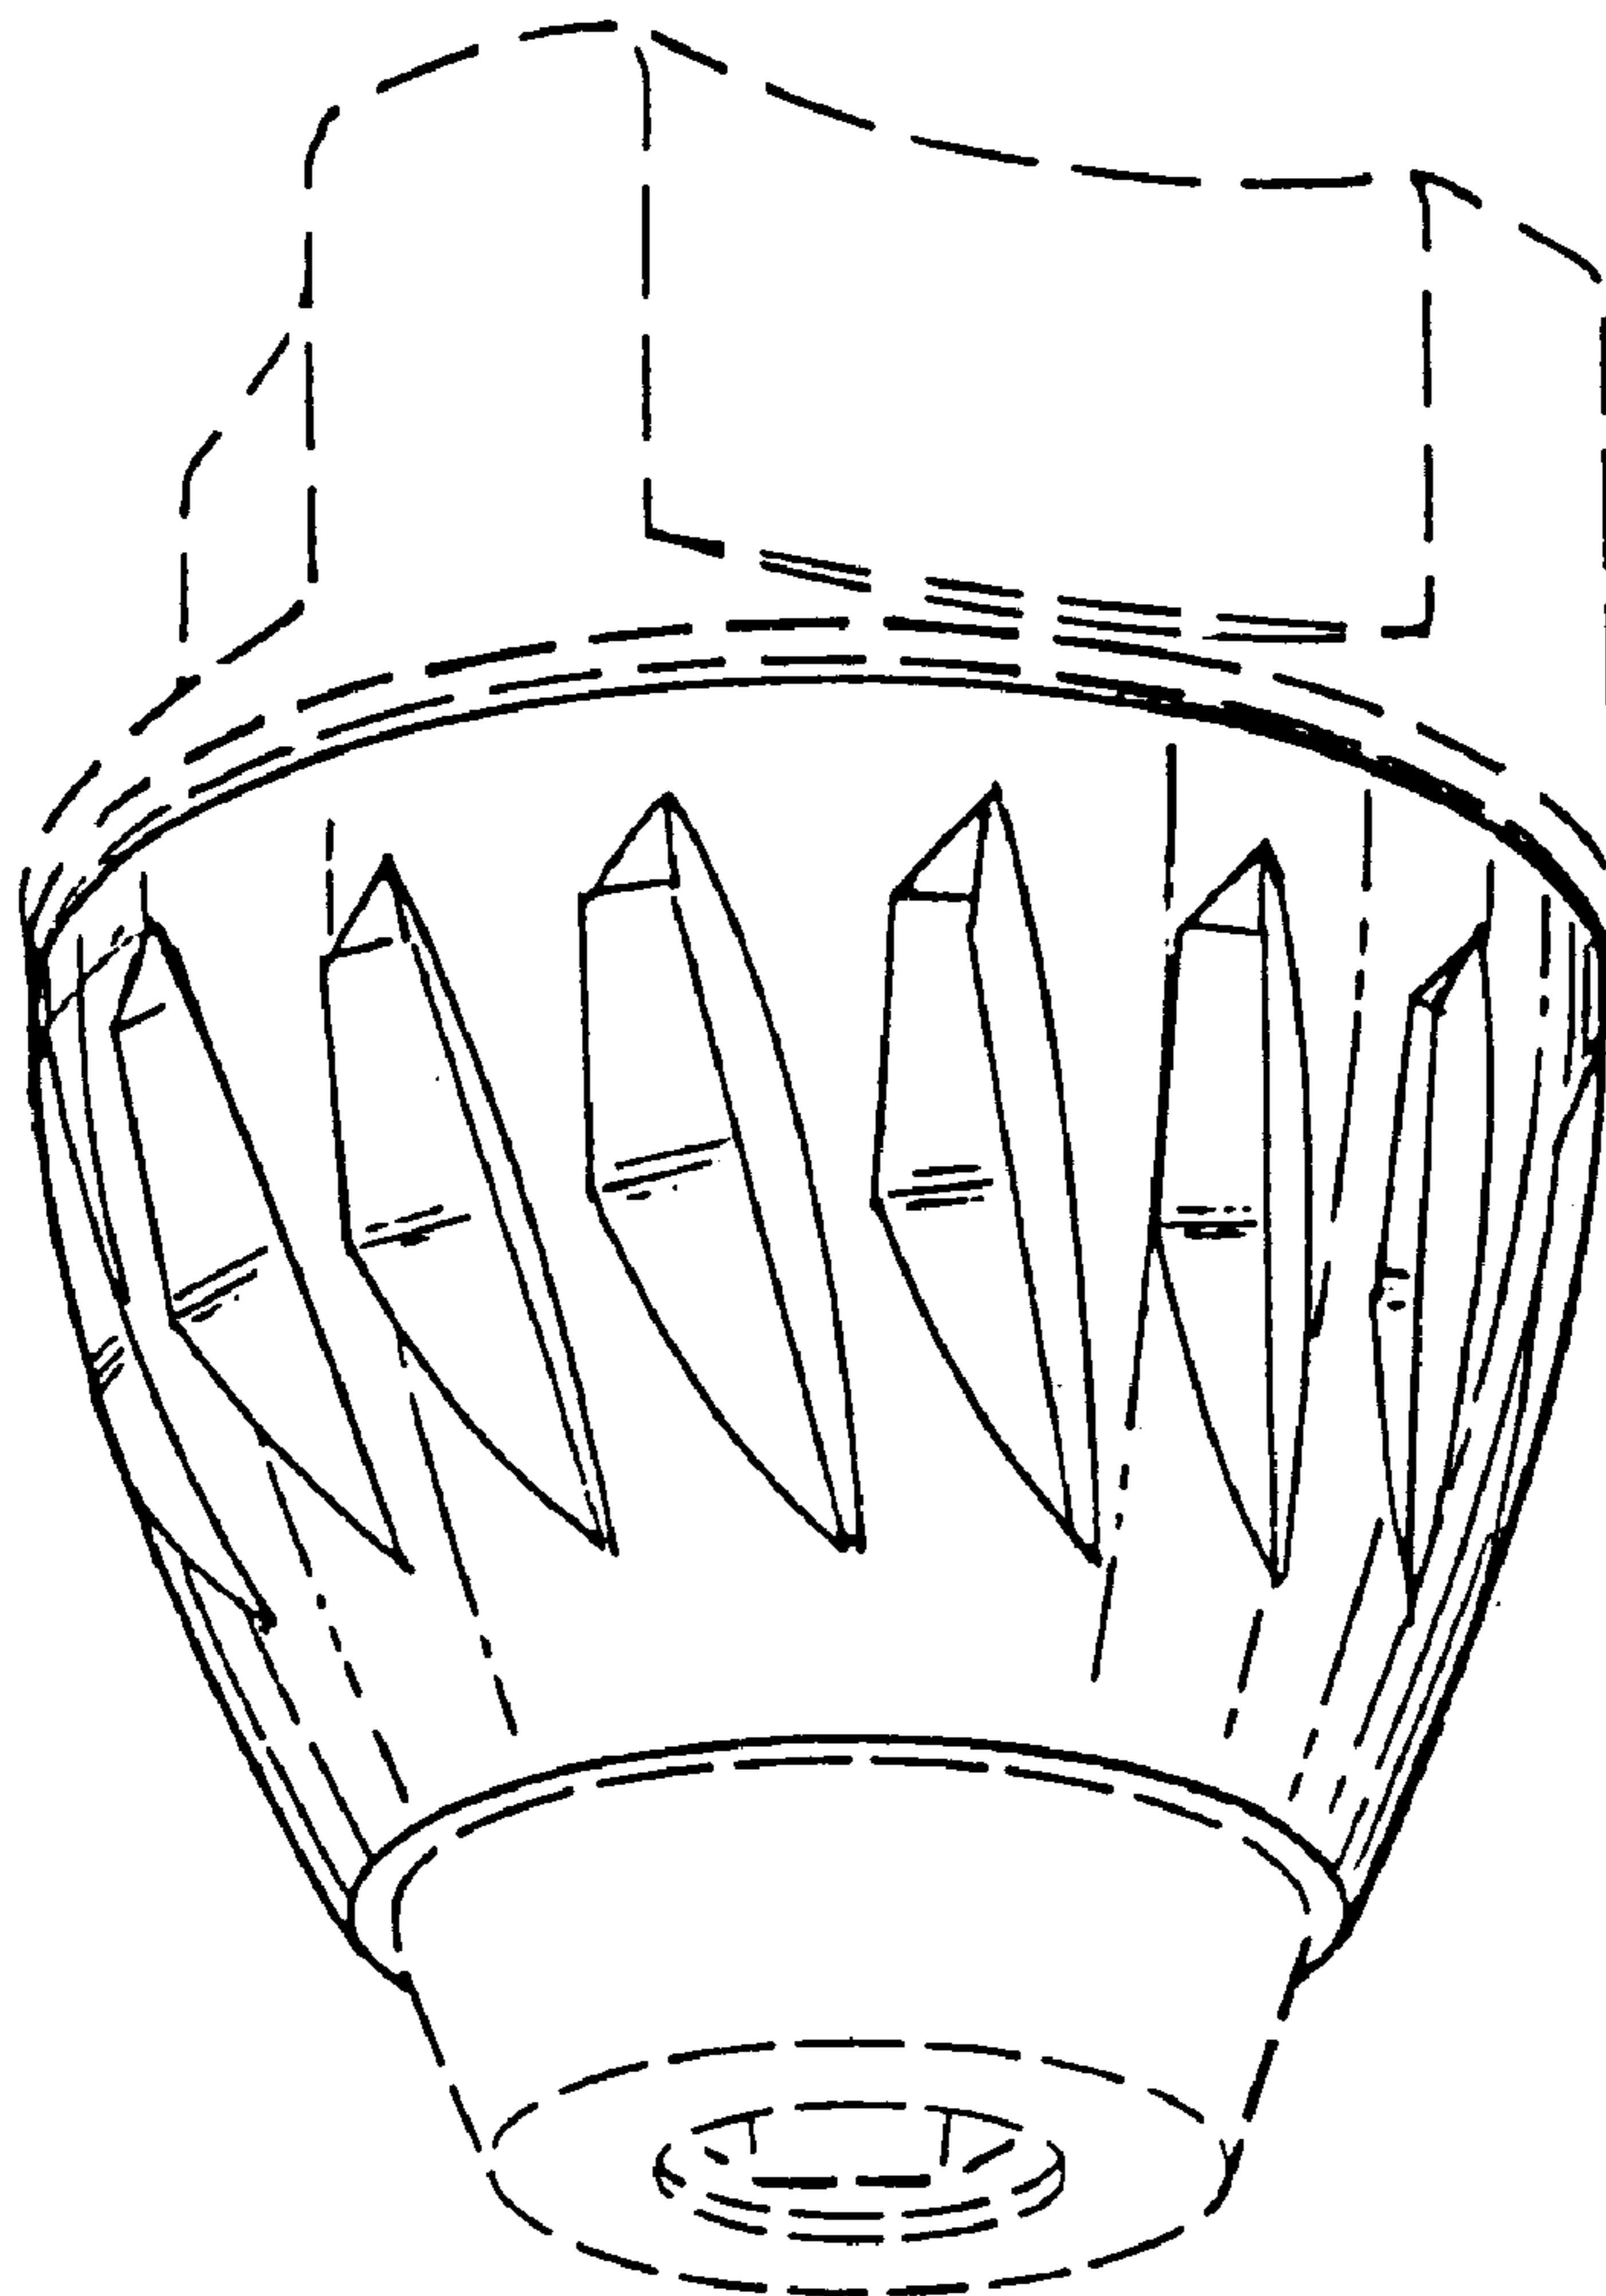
is another side view of the fluted front chuck sleeve as illustrated in FIG. 1.
